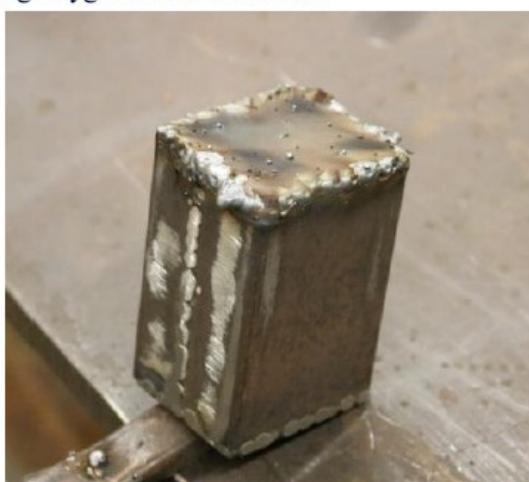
The completed box with the ends welded and ready to go to the forge.
